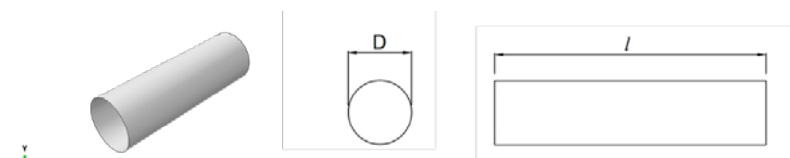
Geometrical cylindrical shell: (a) unstiffened cylinder shell
